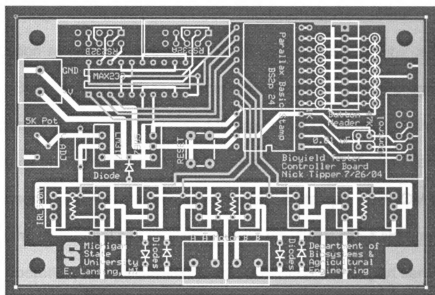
PCB Design for the bioyield instrument's electronics.
